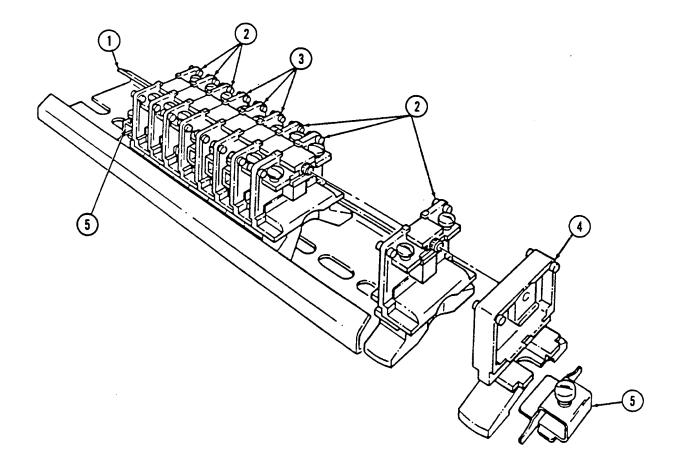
Channel, 7.00-in. (177.8 mm) and Terminal Block Assembly.
